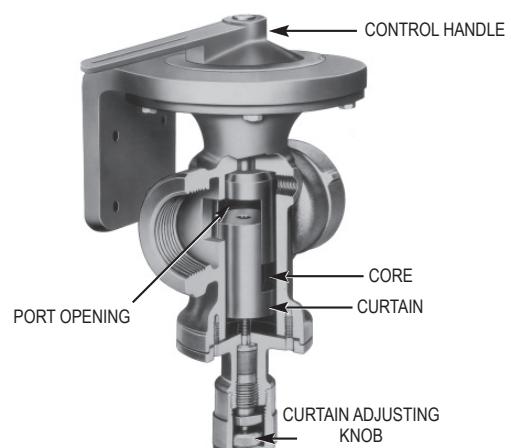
Figure D. A.P. Valve for gas, oil, water, steam, compressed air.
